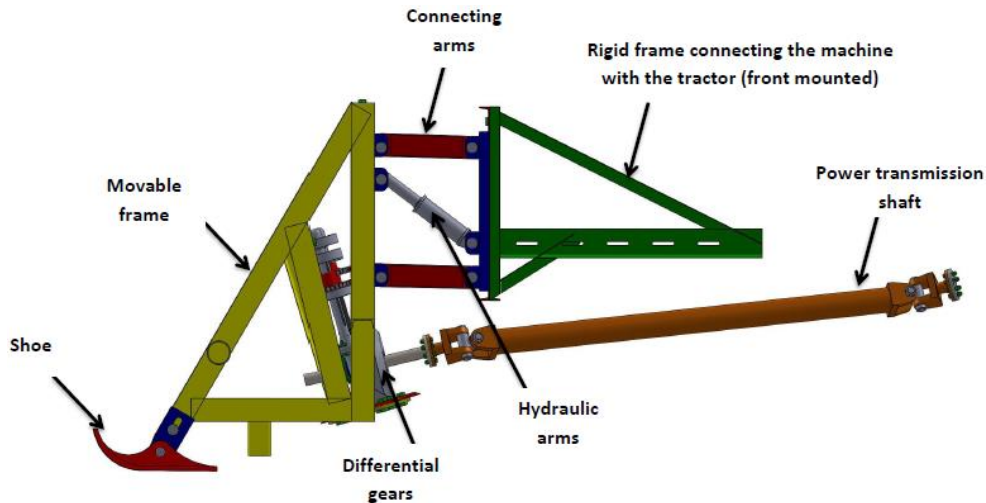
Side view of the proposed machine designed by SolidWorks program.
